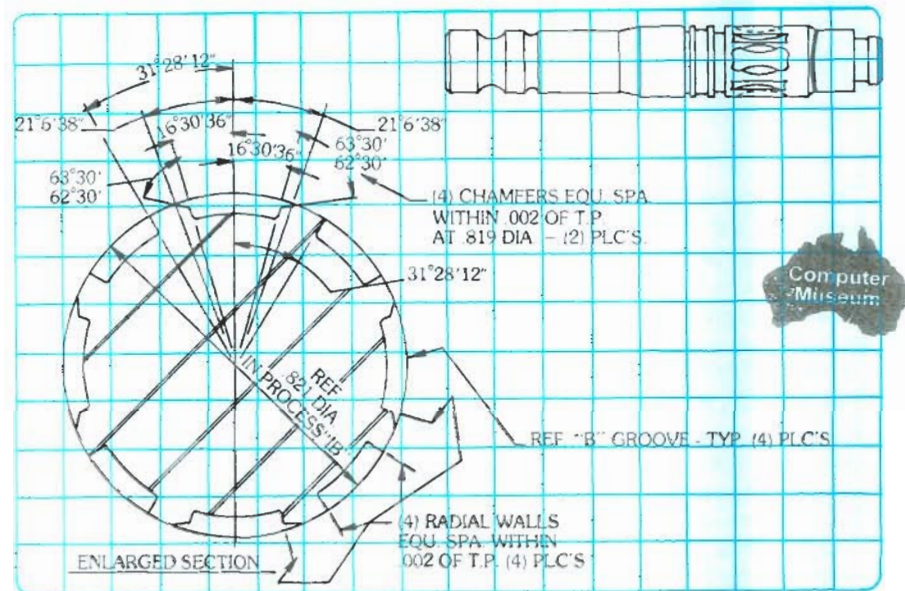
Cross-section of rotary valve input shaft for power steering gear.
